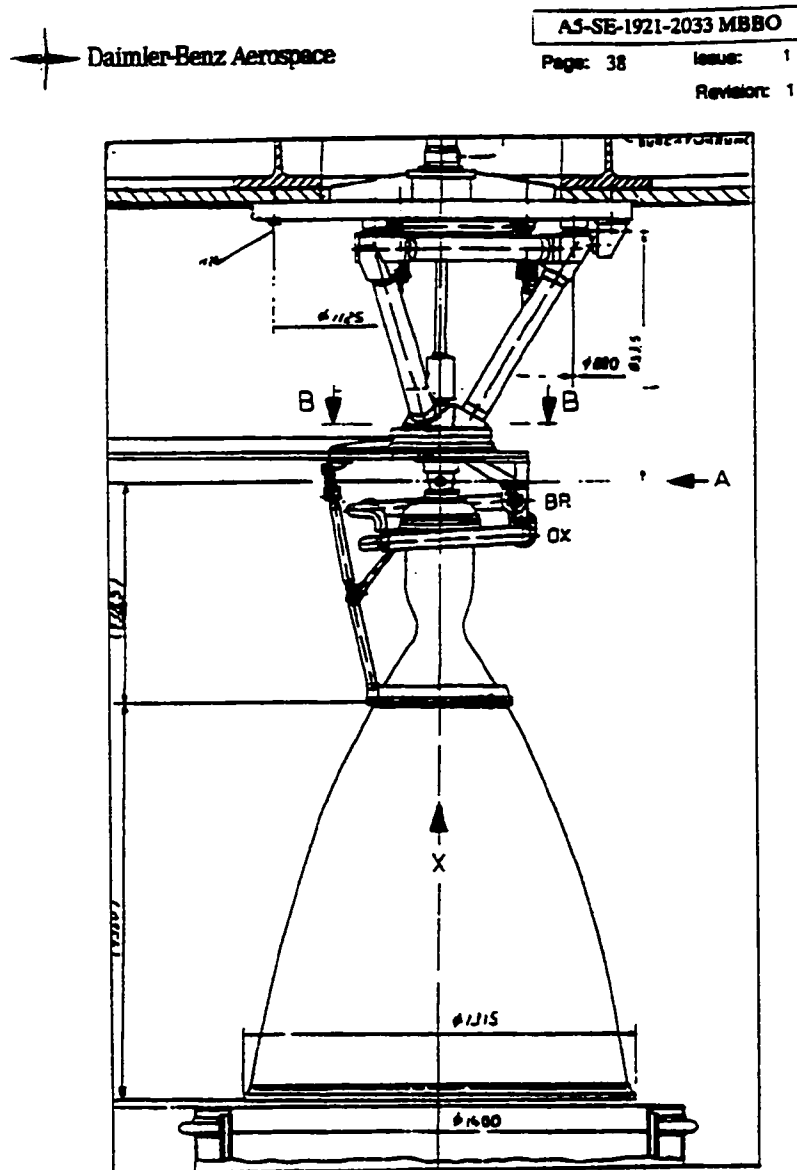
Rocket Engine Mounted in the Test Bed²⁵
